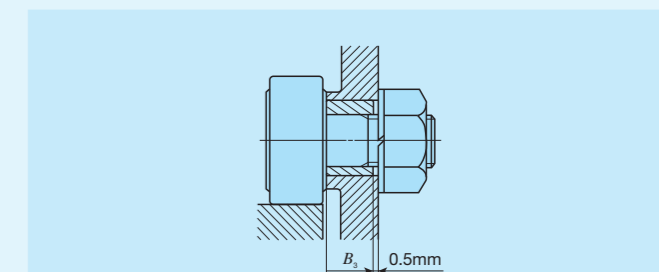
Length of a mounting hole for Eccentric Type Cam Followers
